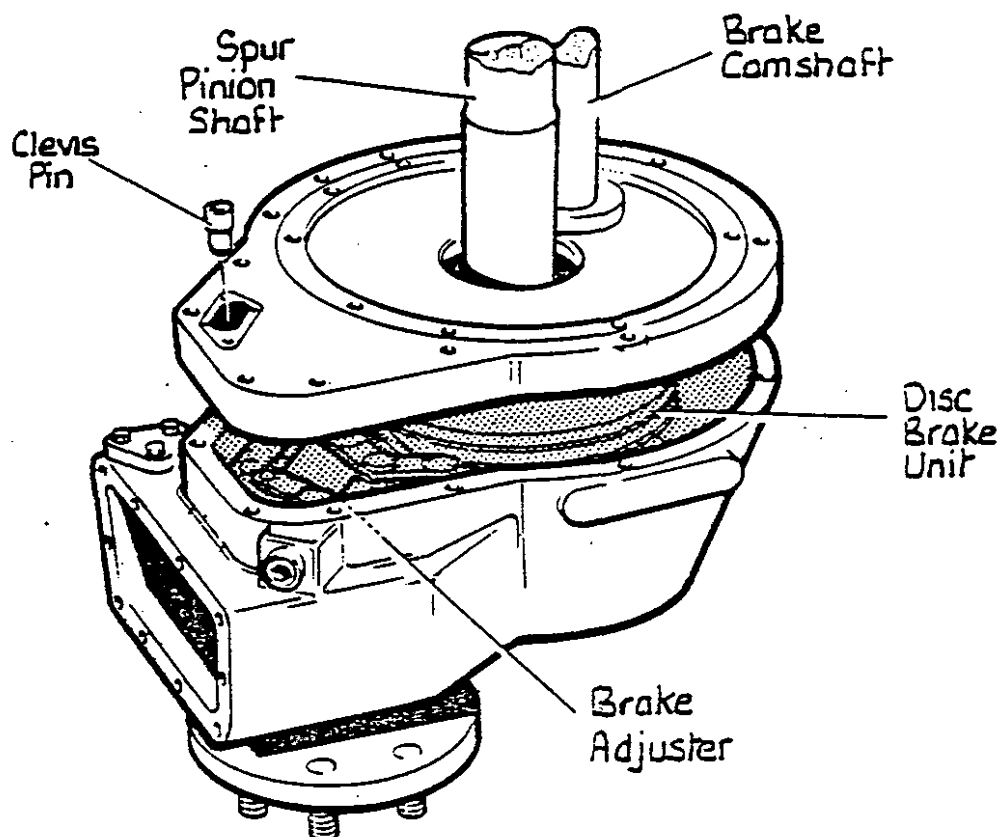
REMOVING REDUCTION CASE HOUSING
